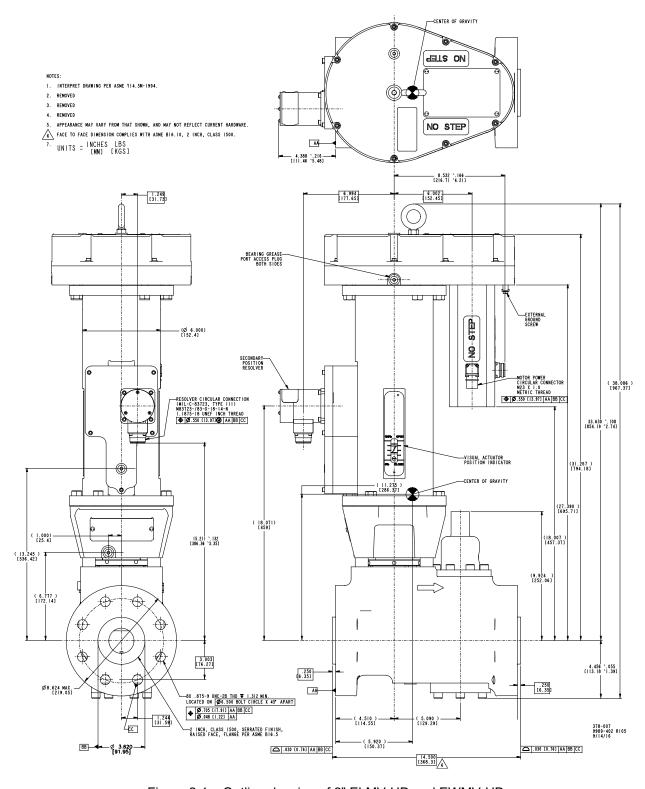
Outline drawing of 2" ELMV-HD and EWMV-HD
